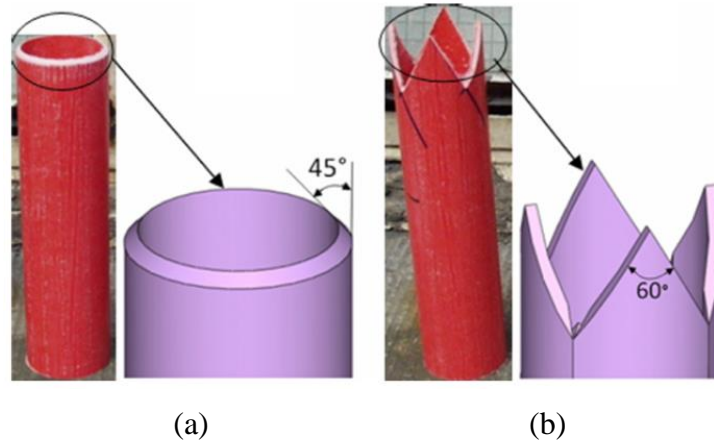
Composite tube specimen triggering method (a) a 45° chamfer (b) a tulip pattern with an included angle of 60° between the edges [118].
